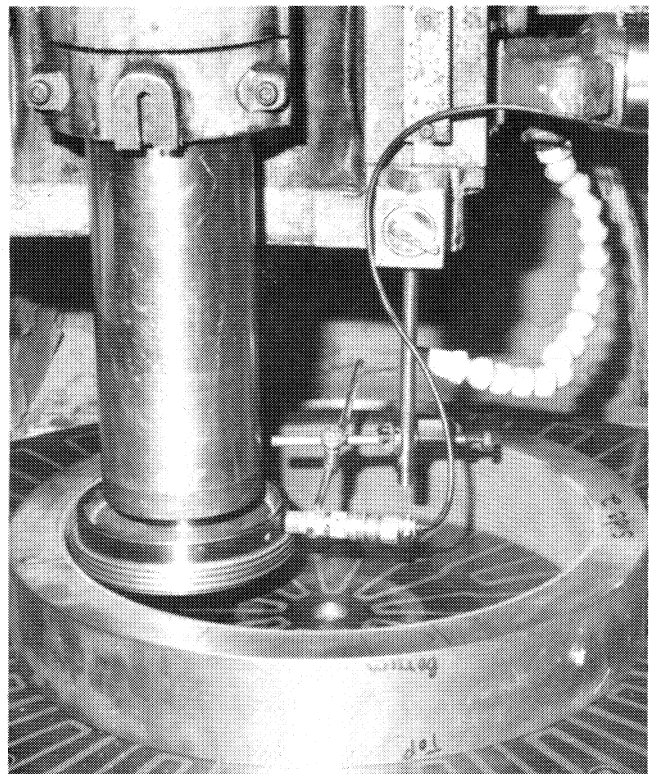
Closer View of Test Setup with Speed Counting Sensing Device in Place.
